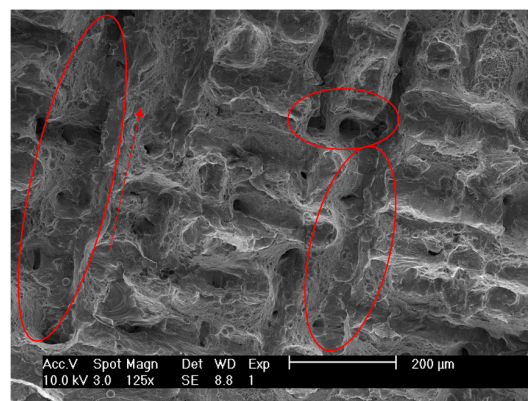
Fracture surface of HS/SM sample 3D-printed at 200 mm/s.
